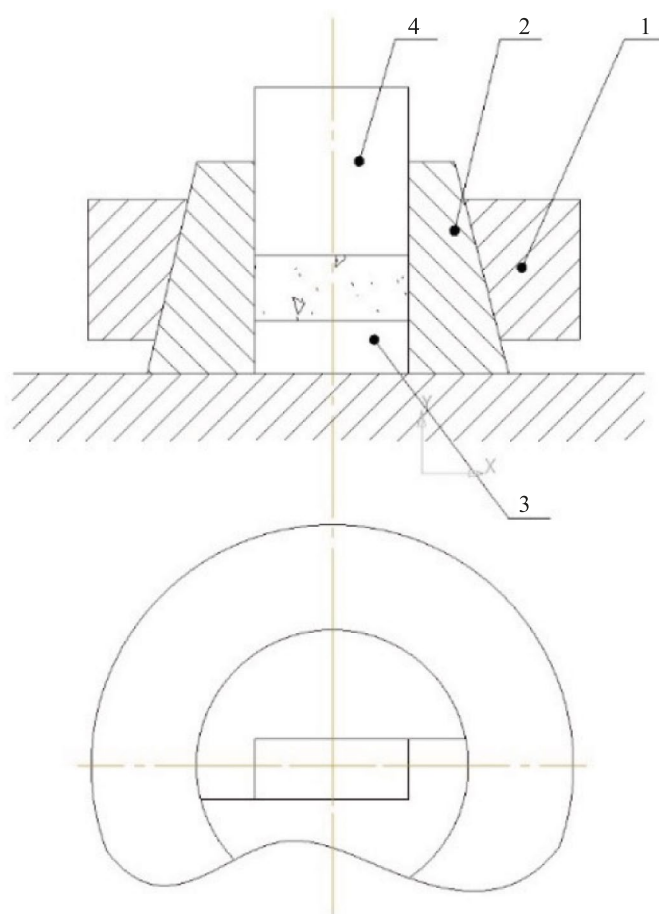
Diagram of the mold for cold pressing of prismatic samples
